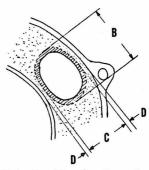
Outside of outer valve cover should be enlarged to limits of "O" ring seal, Inside of cover should have an oval opening 24 MM (B) by 20.5 MM (C). Hole should be 1.5 MM from each side of cover (D).
